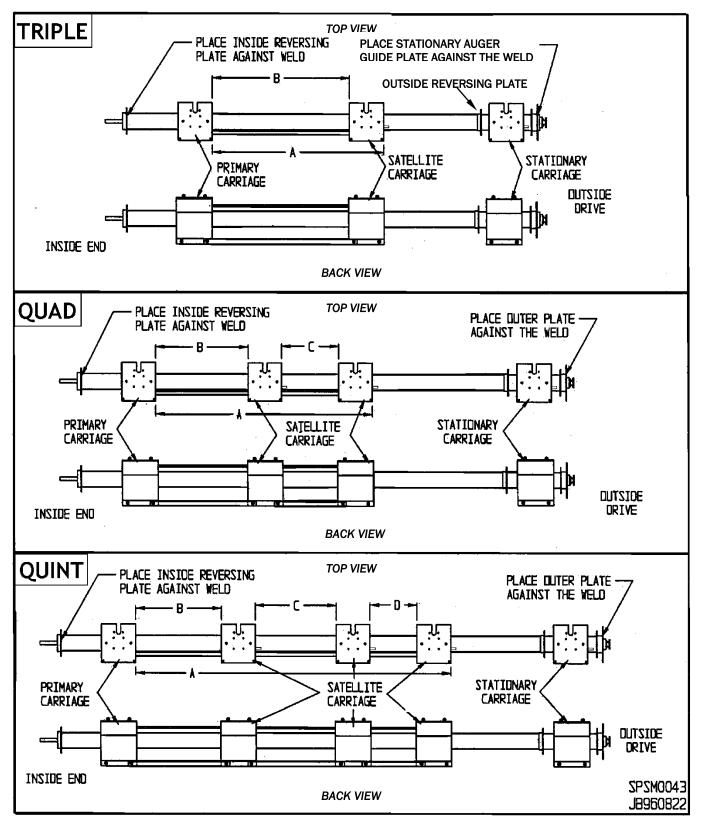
Tie bar & carriage placement for Fastir Plus (See Table 8 for part #s & dimensions)
